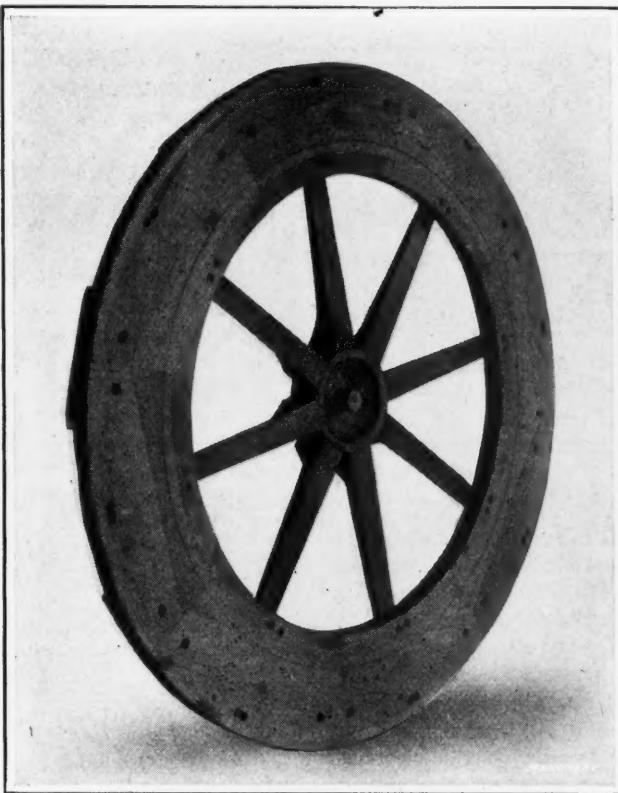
Front View of Faceplate for Patternmakers' Lathe
